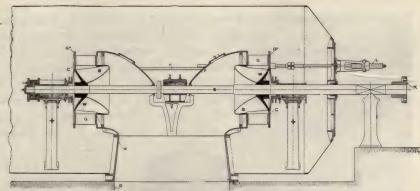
Doube Horizontal Turbine in Closed Penstock. Dayton Globe Iron Works Co. (see page 518).
